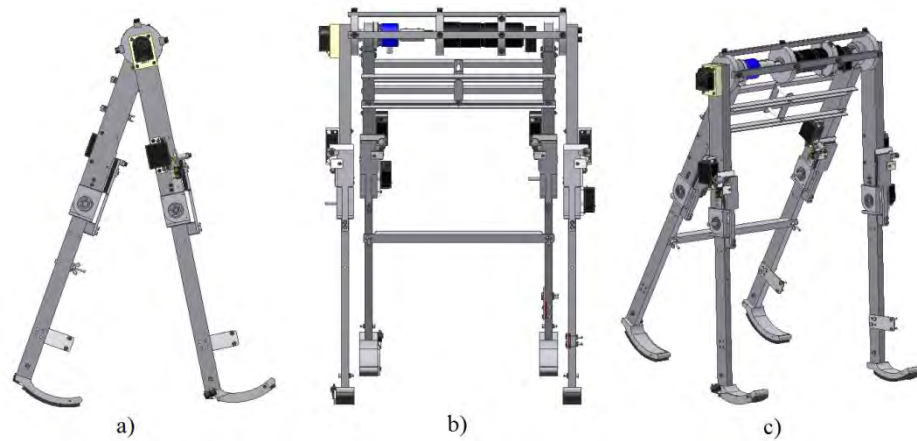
Biped assembly views - a) Side view, b) Front view, c) Isometric view
